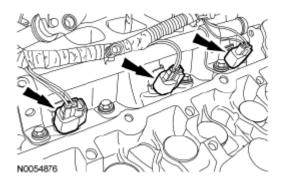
Locating Fuel Injector Electrical Connectors Courtesy of FORD MOTOR CO.
